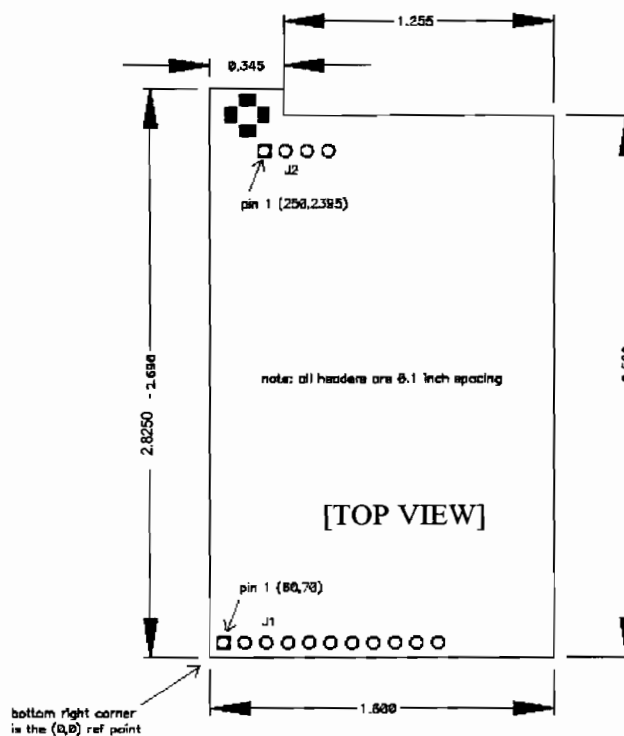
Top view diagram of the 9XStream module with pin layout and dimensions.
